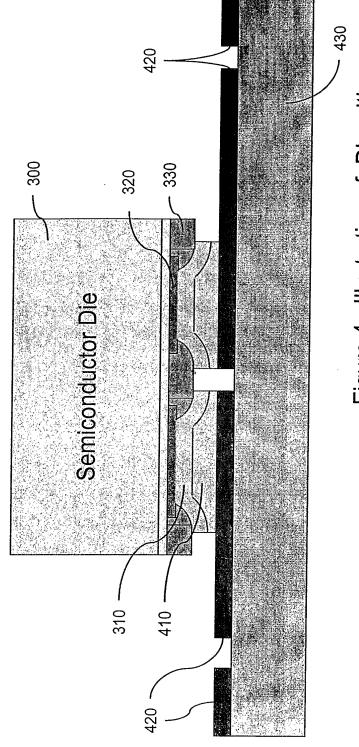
Illustration of Die with Solderable Electrical Contacts Mounted on Printed Circuit Board
